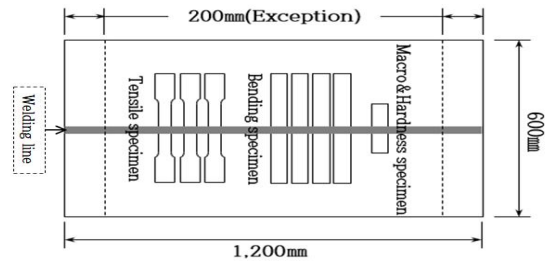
Location of test specimens for mechanical properties testing on welded aluminium profile
